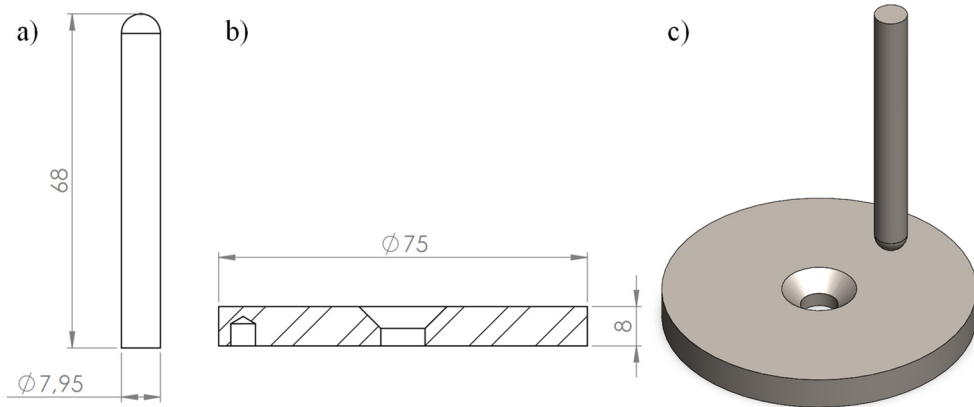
Dimensional, in millimeters, of (a) Pin; and (b) Disc samples; and (c) Schematic assembly. (Source: Adapted from [7].)
